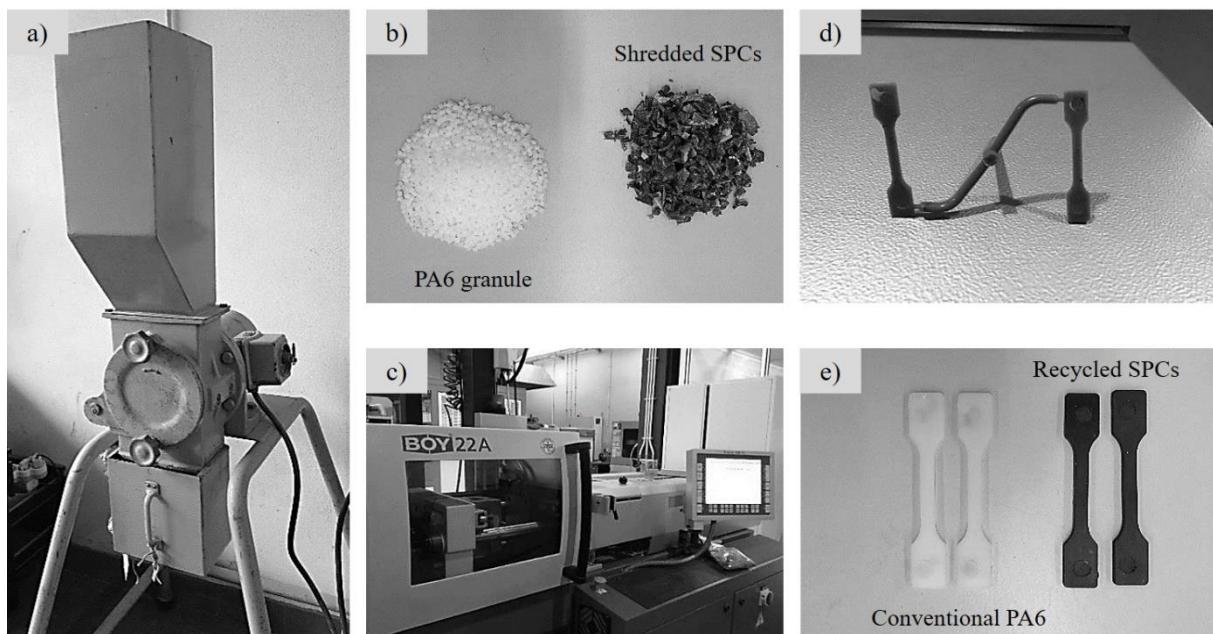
a) Inserting the fractured test sample into the shredding machine; b) the PA6 granule and shredded SPCs test samples; c) BOY 22A reciprocating screw injection molding machine; d-e) End-gated dumbbell shaped bars for tensile test specimen.
